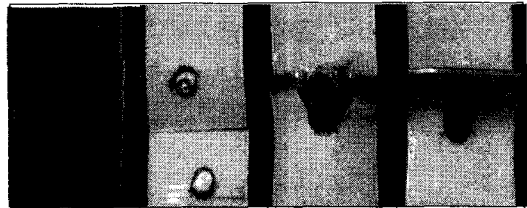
Fractured specimens at electrode force 270kgf & clearance 5mm (a) test specimen (b)6KA (c)10KA (d)12KA
